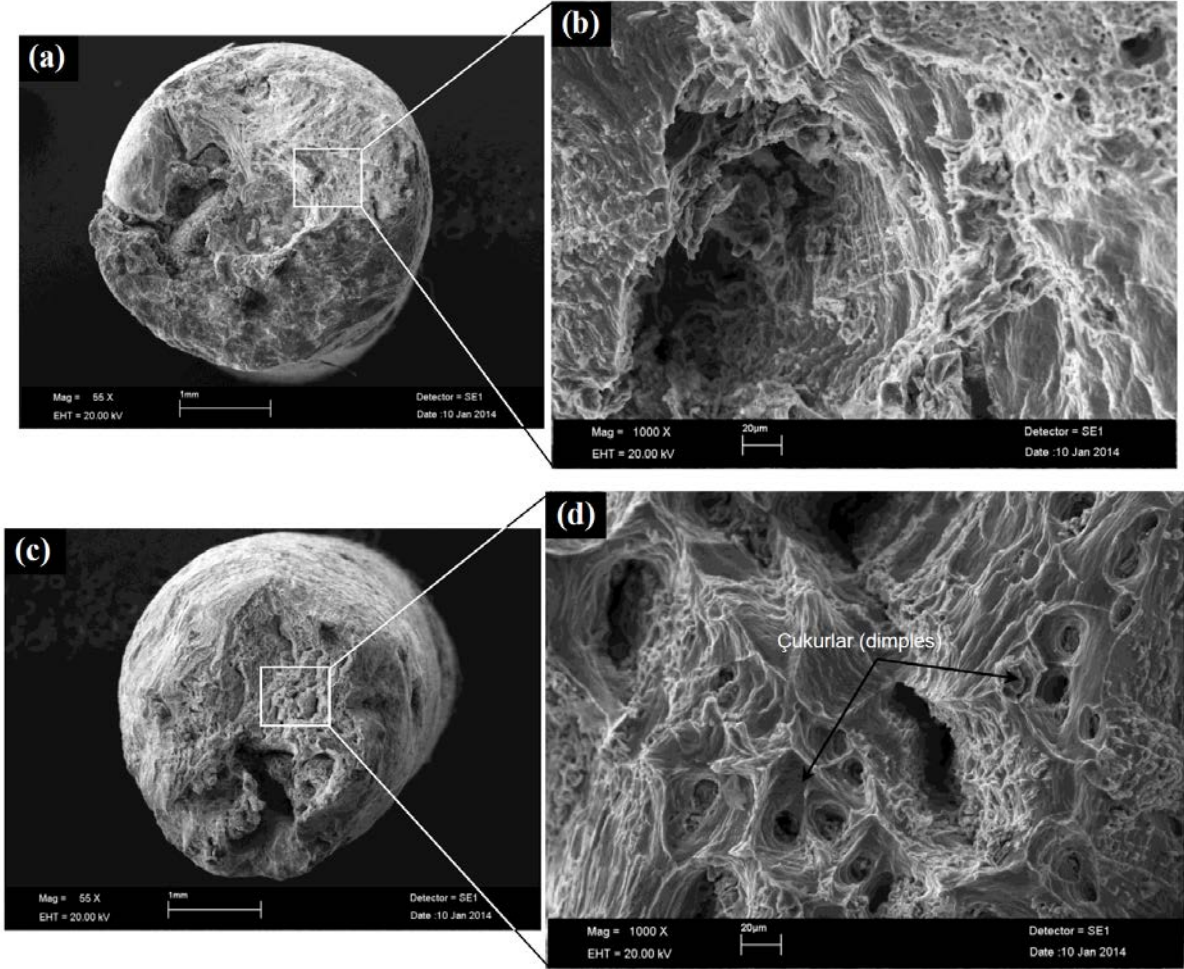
SEM fractographs showing tensile fracture surface; (a) and (c) general morphology of the fracture surface (b) and (d) high magnification view of fracture
